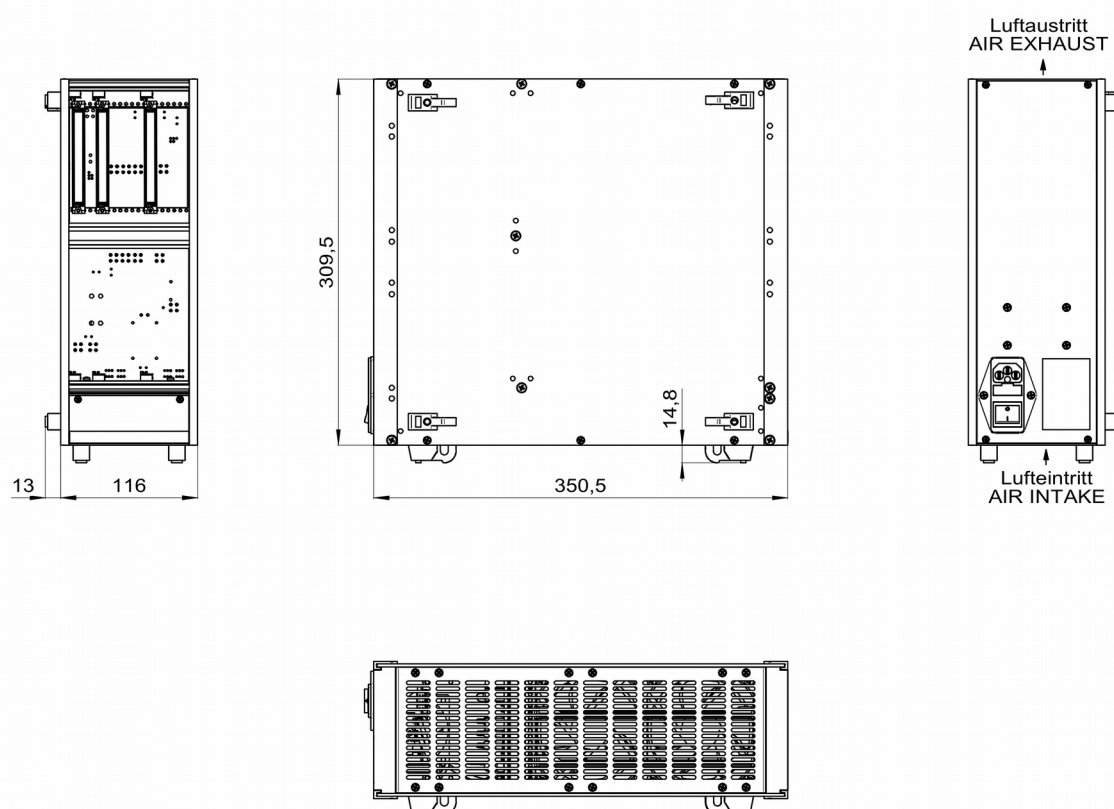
Dimensional drawing ECH 242 – 2 channel MMS crate
